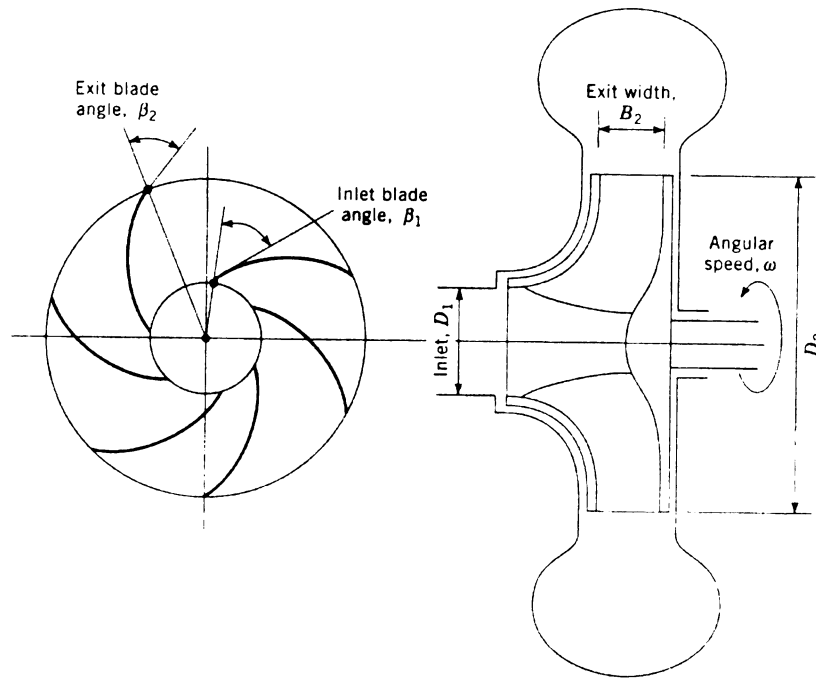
Frontal and cross-sectional view of pump impeller (after John Tuzson, 2000)
